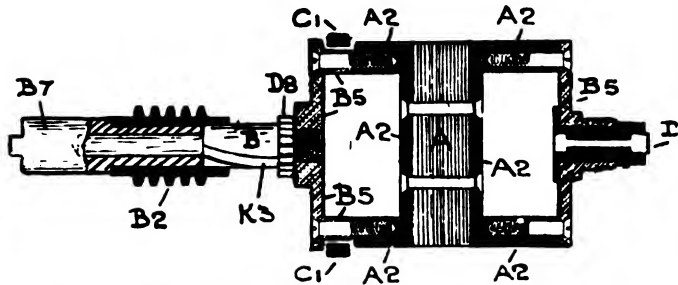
The Lacoste High-Tension Magneto. Sectional drawing showing the construction of the Armature, which has flanged brass Side Plates, A^2 , riveted to the laminated core. The End Plates, B^2 , are attached to the side plates by screws in the usual way.
